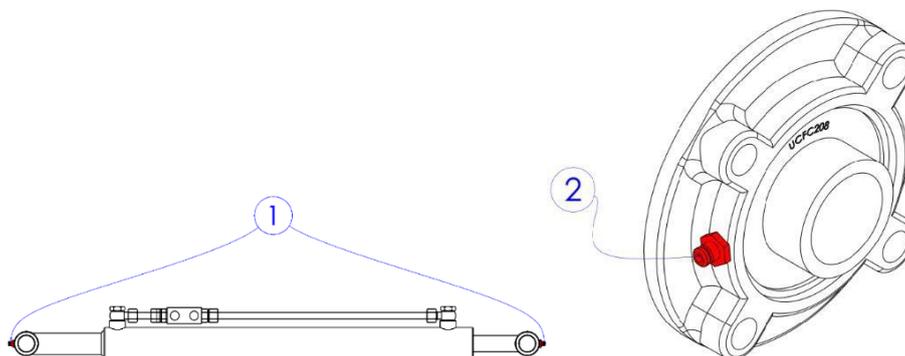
Lubrication point of Lower arms servomotor and bearings:
